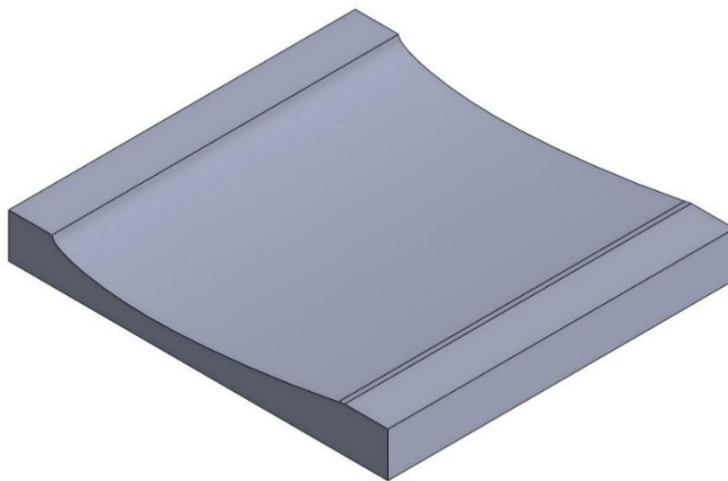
CAD Model of the NACA 2412 Airfoil Mold
